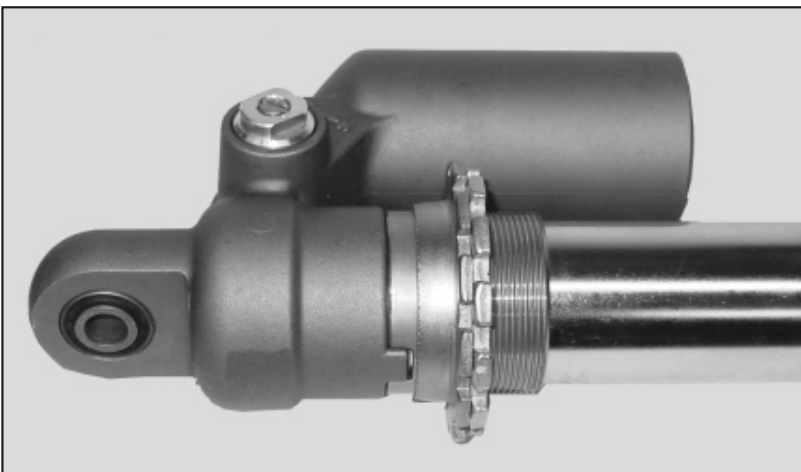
To fit the Works' springs, break the pre-load nuts loose and then reverse them. Install the pre-load collar assembly making sure to align the notch and tab.
